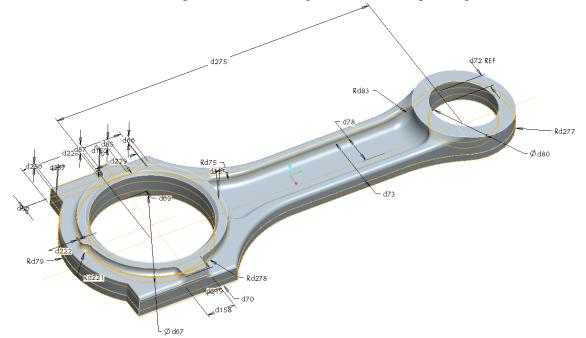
A 3D CAD model of a connecting rod with the parameters (dimensions)
